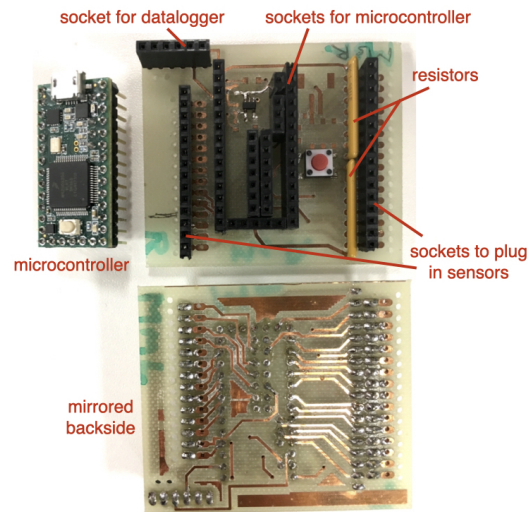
The final milled circuit board with sockets to plug in the electronic components, front and back side (mirrored, showing the soldered connections)
